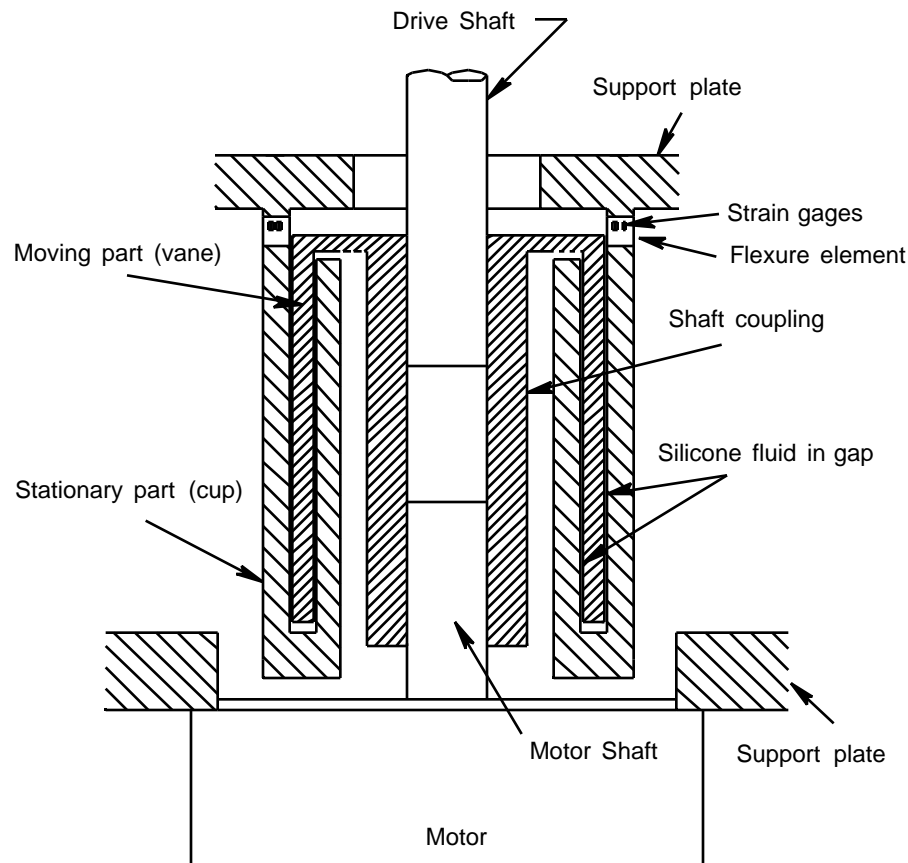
Cross-section of fluid-filled mechanical damper. A cylindrical vane which was rigidly attached to the drive shaft moved inside a cup which was attached to the mechanism housing. Viscous silicone fluid in the gaps between the vane and cup surfaces created drag.
